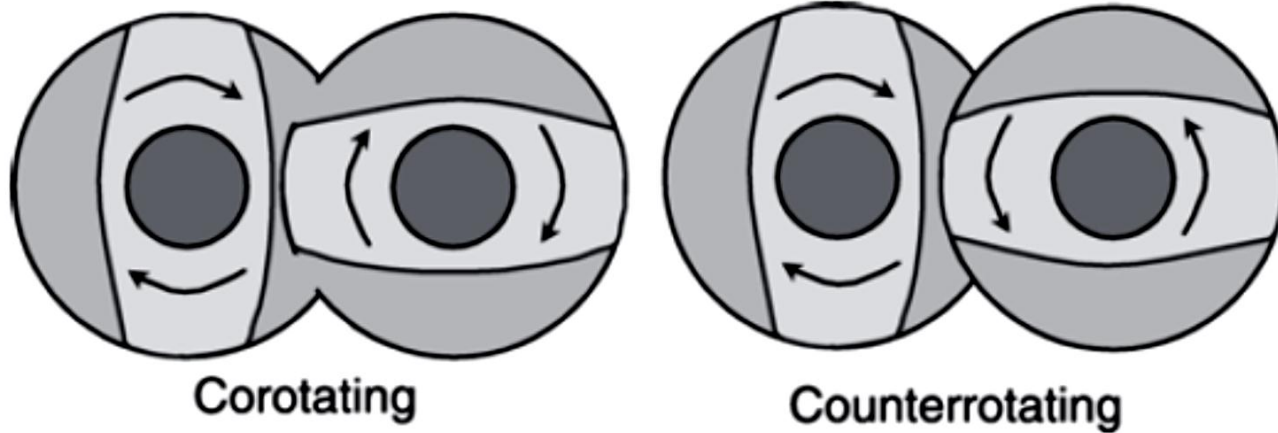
shows the corotating and counterrotating screw rotations viewed from the end of each element from the die end.
